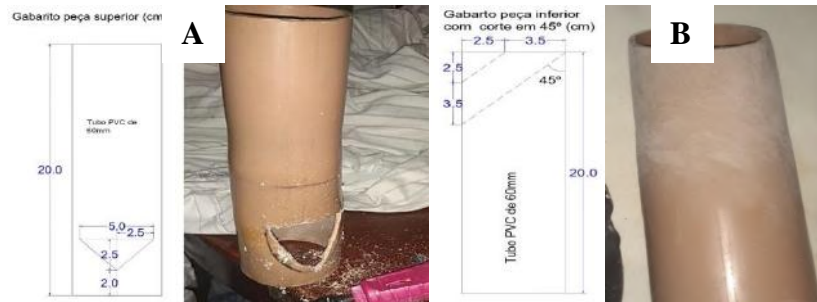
A - Cut triangular upper part in the discharge mouth molding process; B -We have listed the lower part 45 and screwed.
